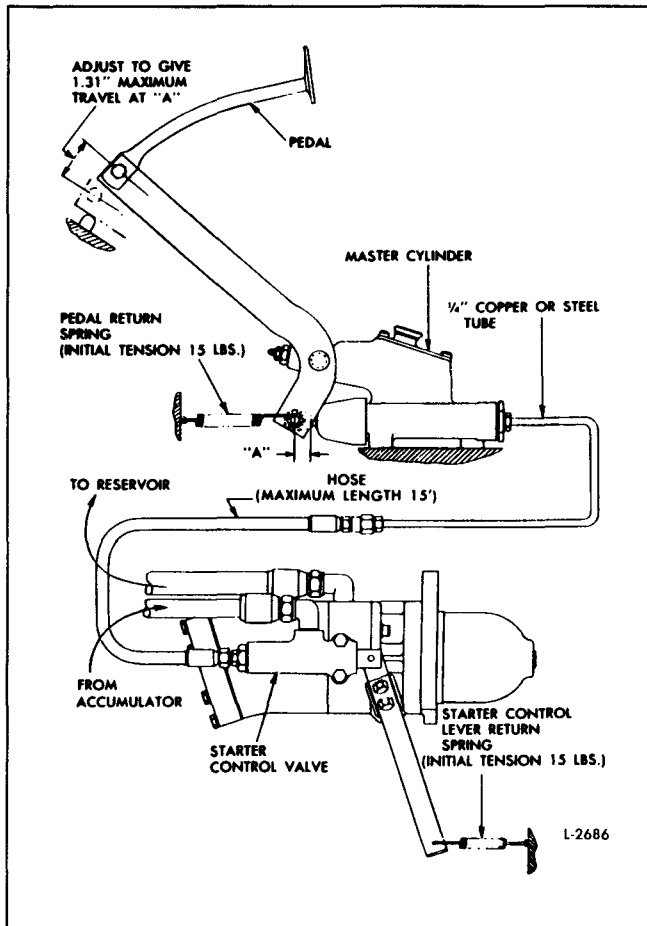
Hydraulic Remote Control System for Hydrostarter
